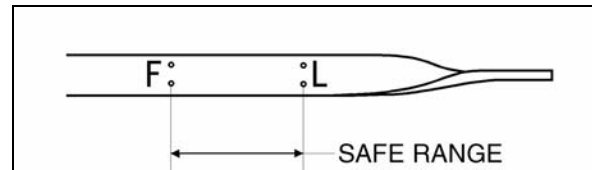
ENGINE OIL LEVEL DIPSTICK
